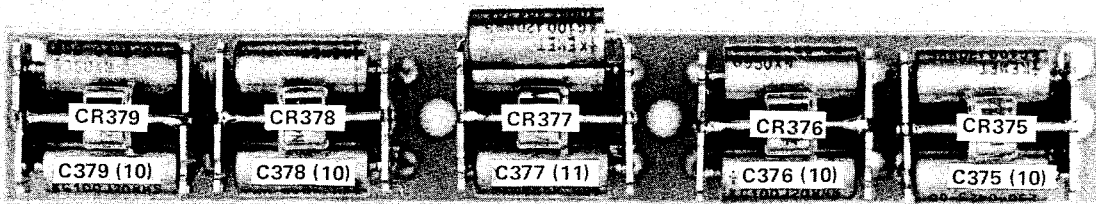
FRONT, REAR & ADAPTER CHASSIS
